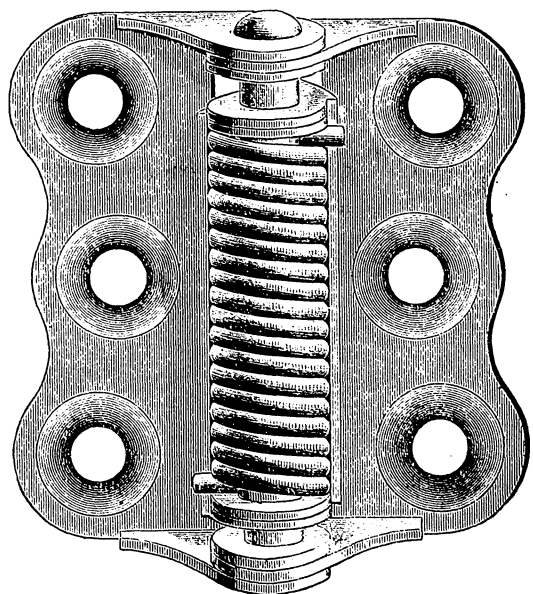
Conqueror Steel Spring Hinge No. 2.
